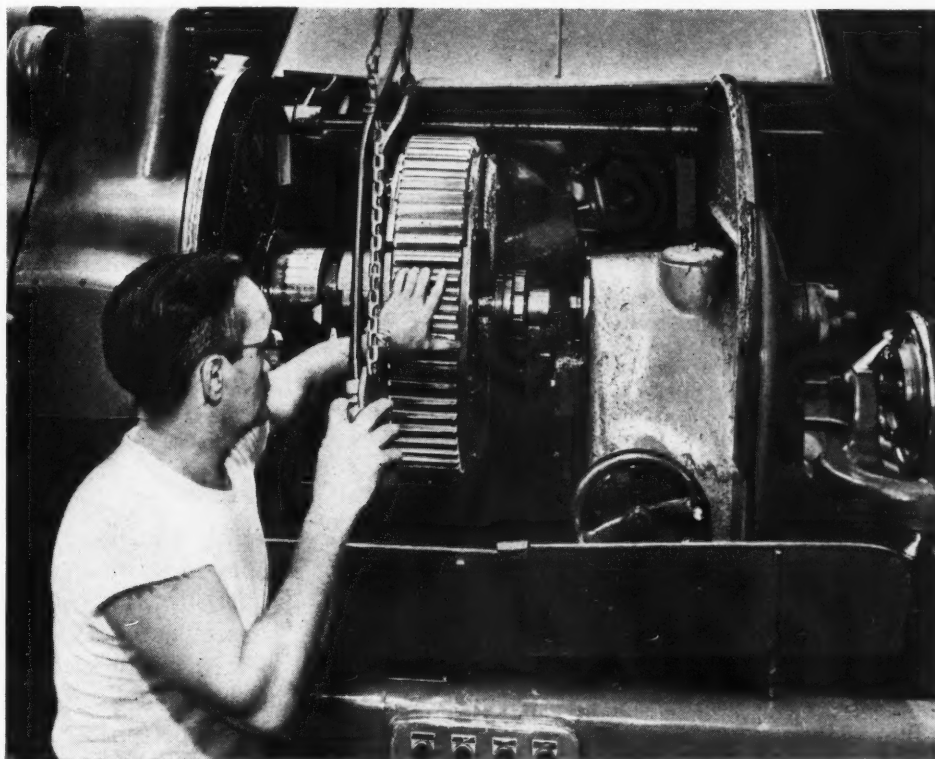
"Red Ring" gear finisher used for crown-shaving drive gears (guard removed to show work)
